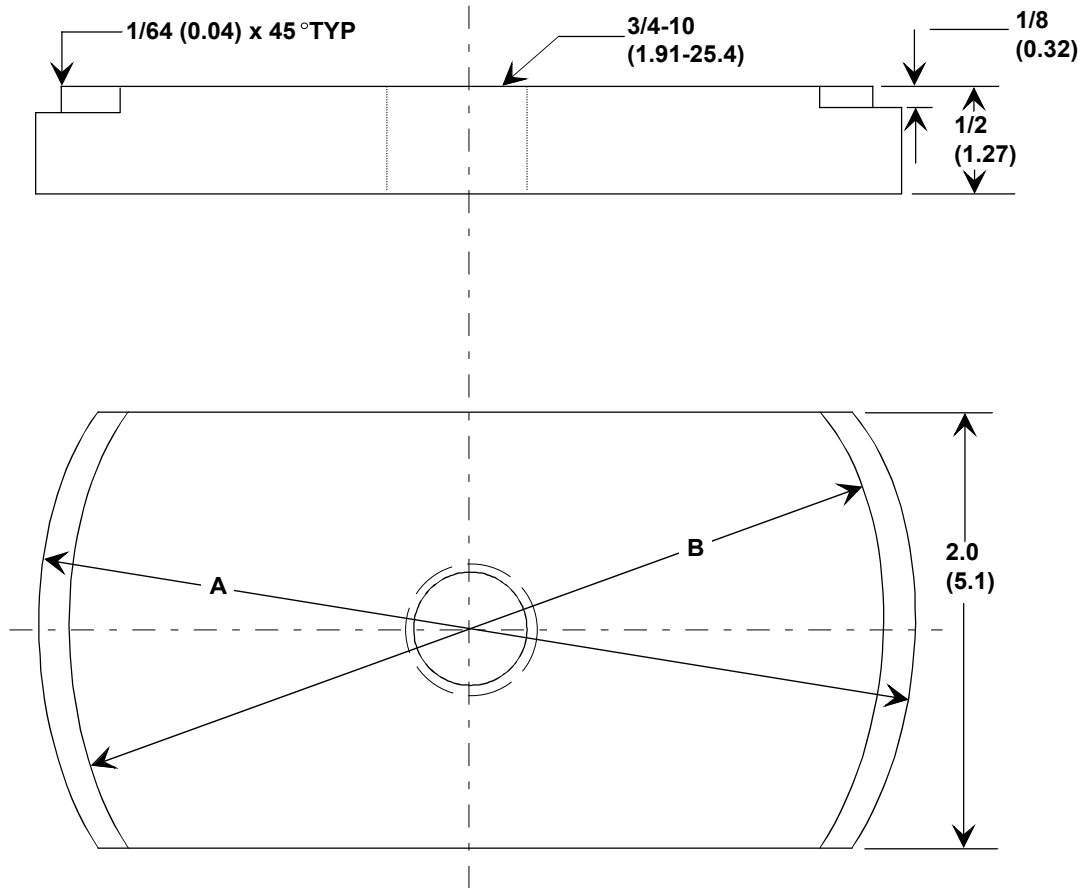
Tubular Spanner Wrench (Ram Pump), MIL-T-7081.
